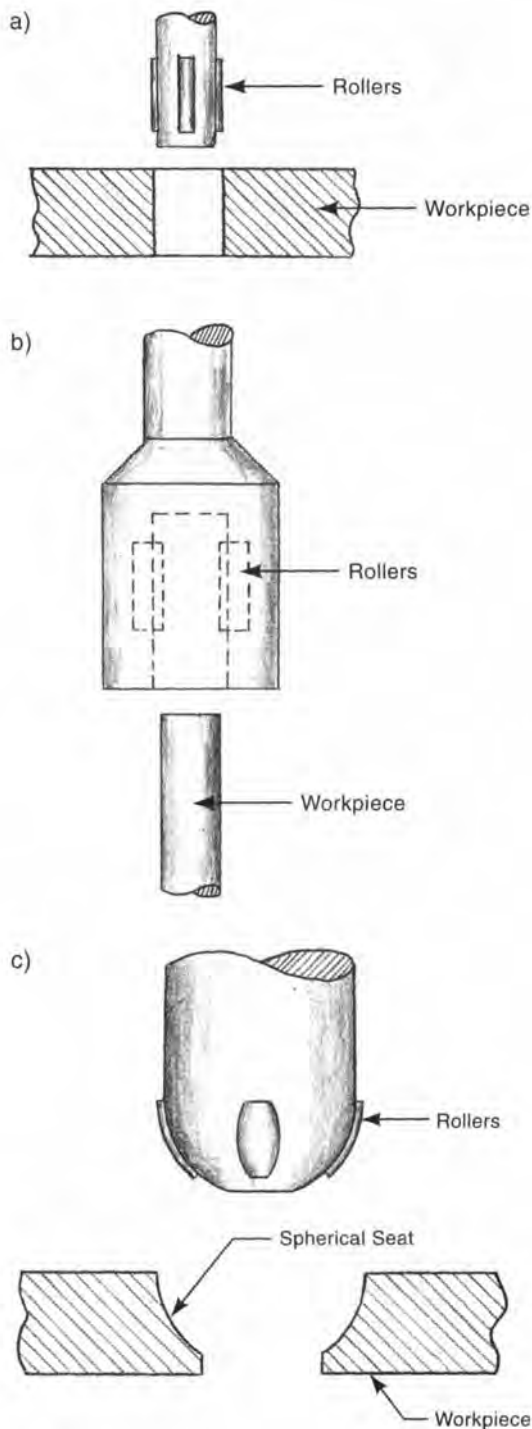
J5a Typical surfaces that can be roller burnished and the burnishing tools used. (from Bralla, *Design for Manufacturability Handbook*, 1998, McGraw-Hill Companies. Reproduced with permission.)
